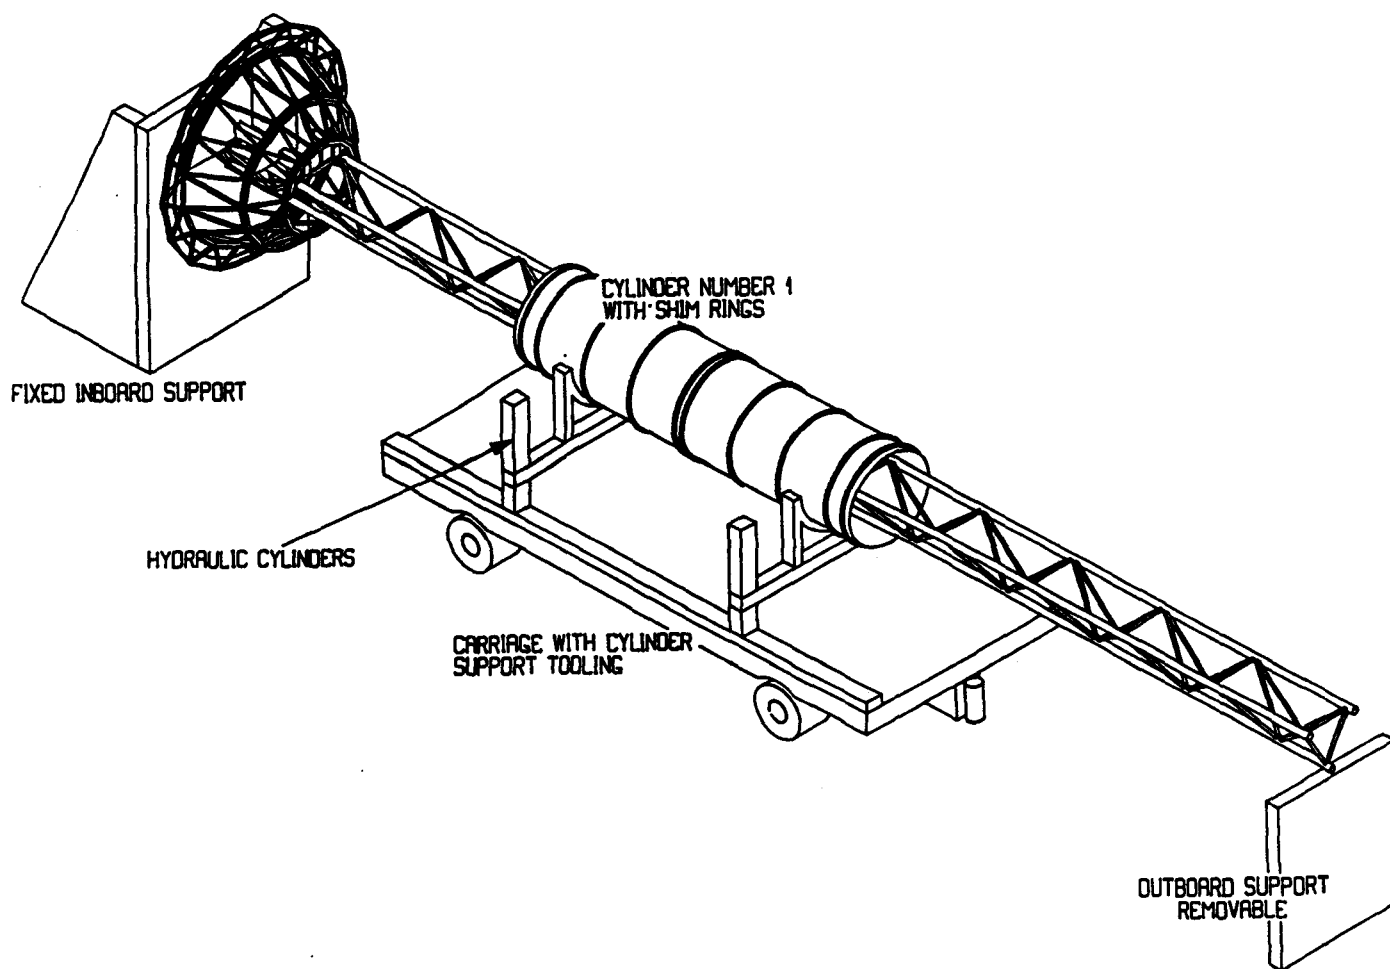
Installing support cylinder #1 on the spaceframe.
